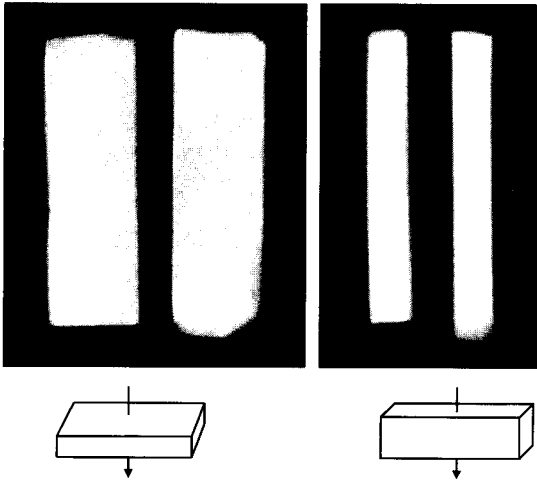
X-ray shows  $\varnothing 0.025$  mm single platinum wire after pressing.(staining technique)
